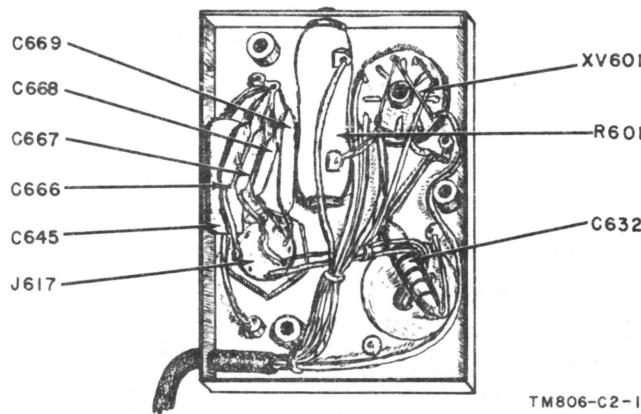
Main frame MOD 5A and higher, bottom view of regulator assembly.
